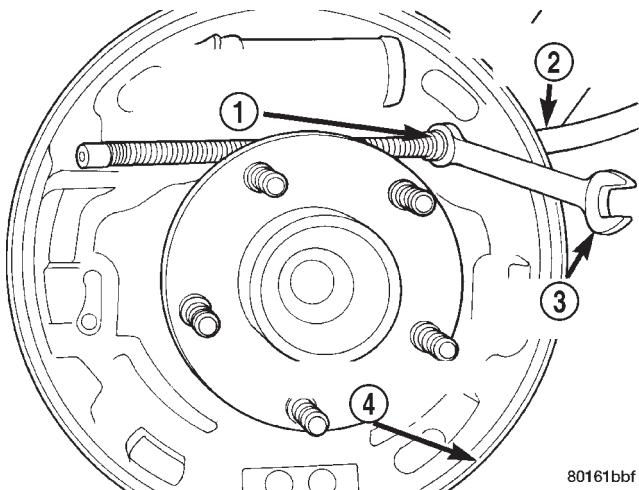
Removing Parking Brake Cable From Brake Support Plate
